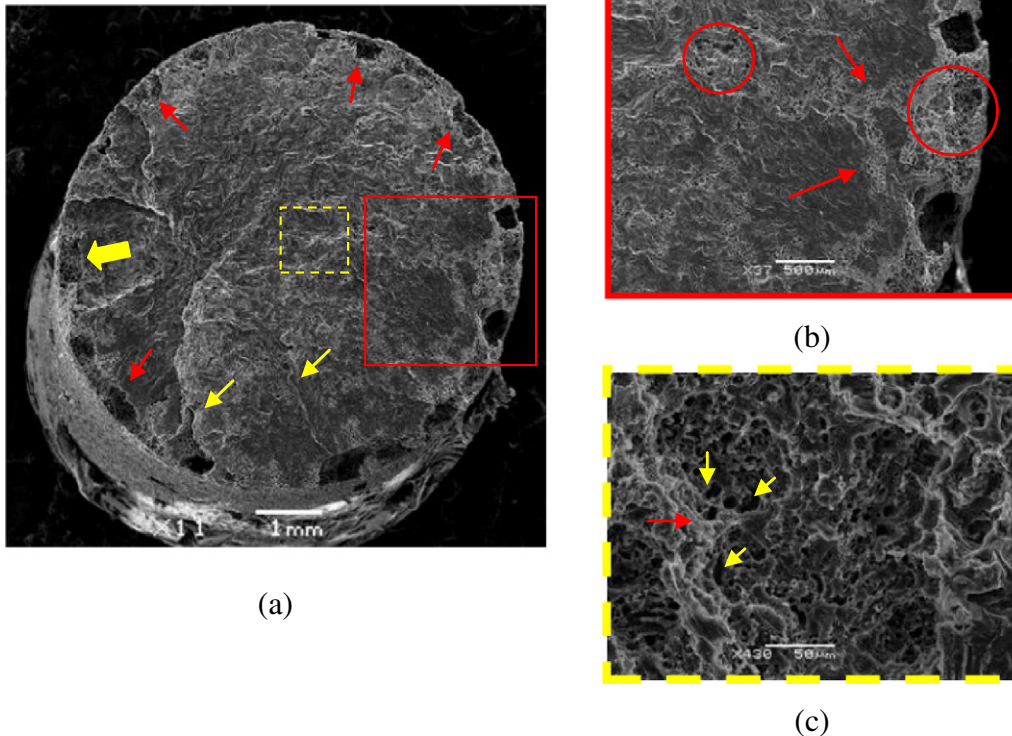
Fracture surface of bulk AZ31B in corrosion fatigue test under stress amplitude of 40 MPa and failing after 5 days and 4 h exposure to 3.5% NaCl solution; (a) overall view, magnified images (b) near the surface and (c) of the final fracture zone.
